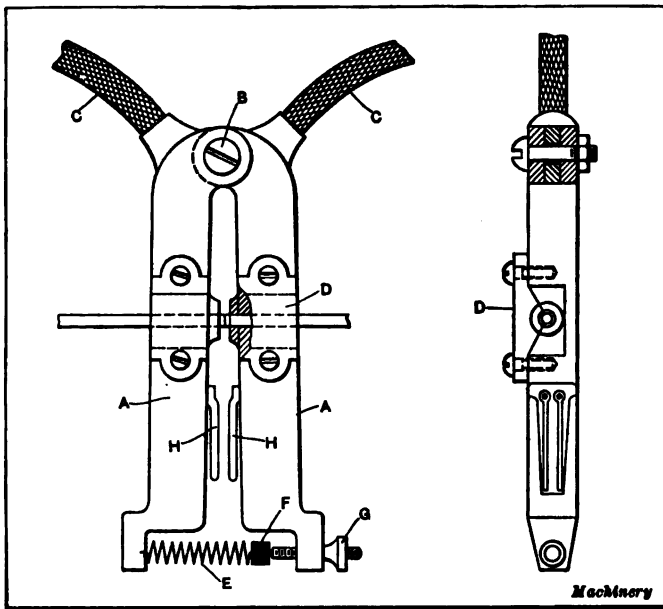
First Practical Electric Welding Device patented by Dr. Elihu Thomson in 1886
